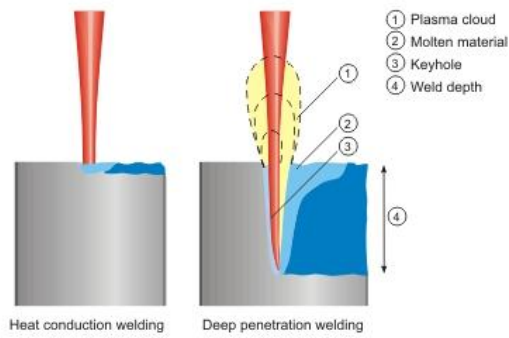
Modes of laser welding (a) Conduction welding, (b) Keyhole welding
